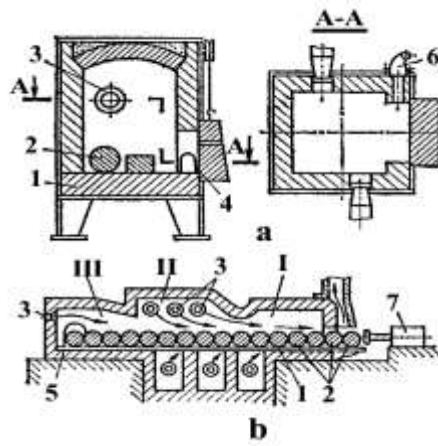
Chamber (bath) (a) and continuous (b) heating furnaces: 1 – bottom; 2 – billet; 3 – gas burner; 4 – lid; 5 – unload hole; 6 – flue; 7 – pusher; I – preheating zone (600...800°C); II – zone of maximum heating (1250...1350°C); III – Standing zone (1200...1300°C)
